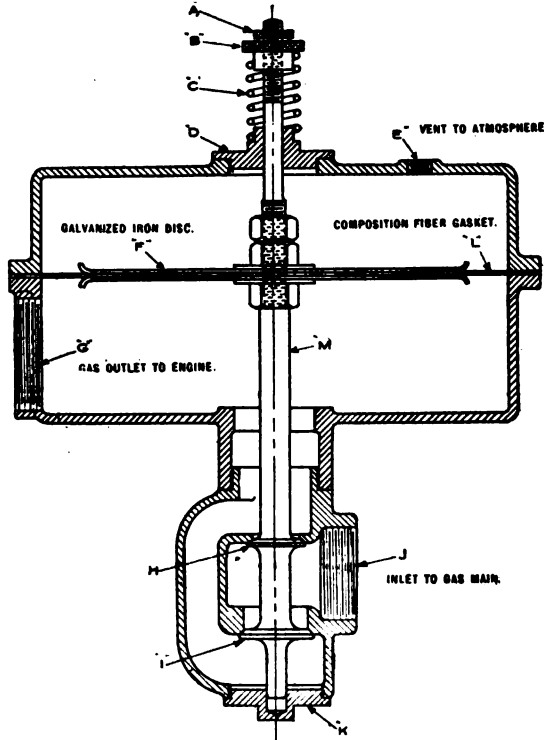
Gas Pressure Regulator for Jacobson Engines.
